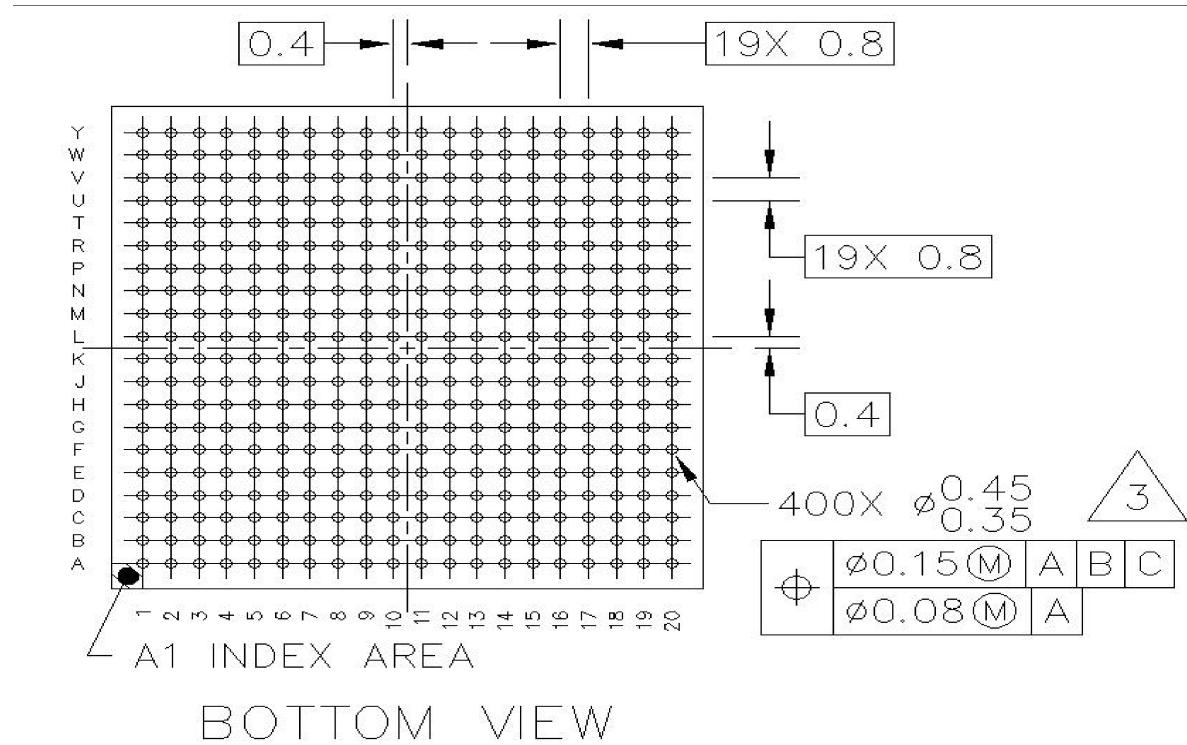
400 MAPBGA 17x17 mm Package Bottom View
